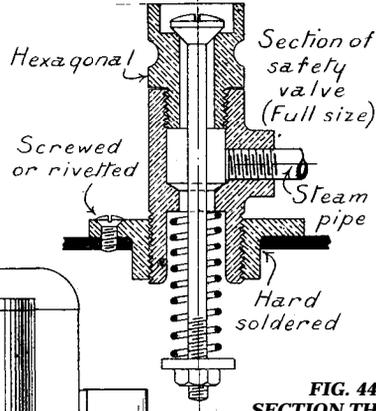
SECTION THROUGH PROPOSED SAFETY VALVE.
